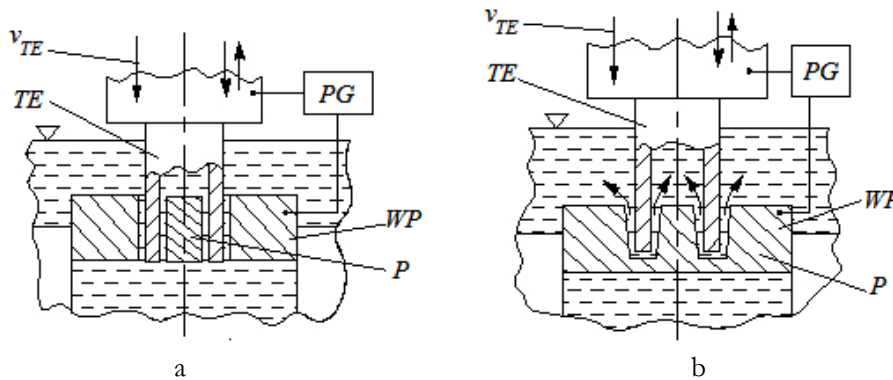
Detaching a part from workpiece by electrical discharge machining with a tubular tool electrode: a – initial thought machining schema; b – obtaining a conical part, due to spurious electrical discharges.
